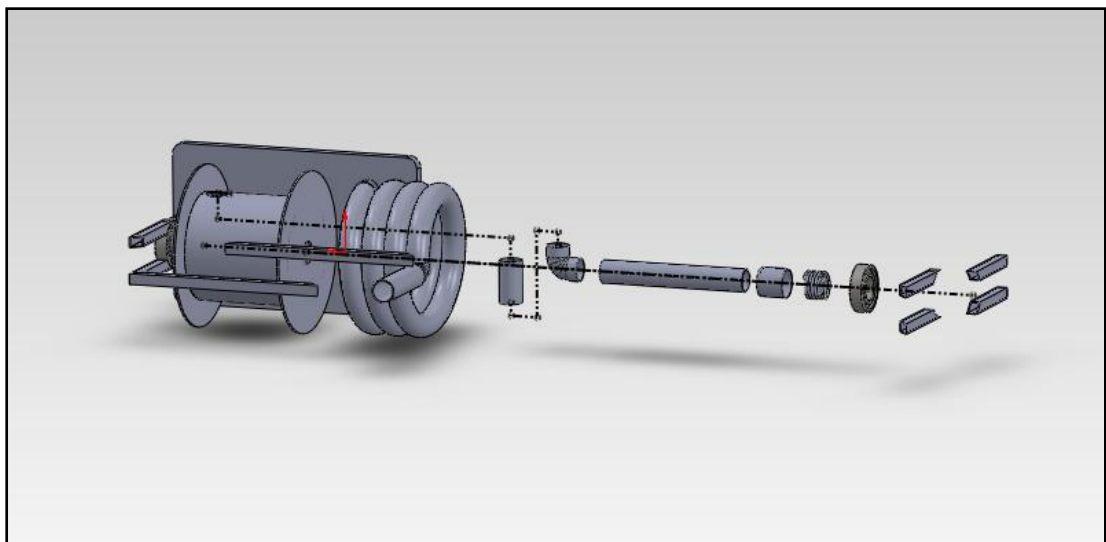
Exploded view of project design using SolidWorks 2011.
